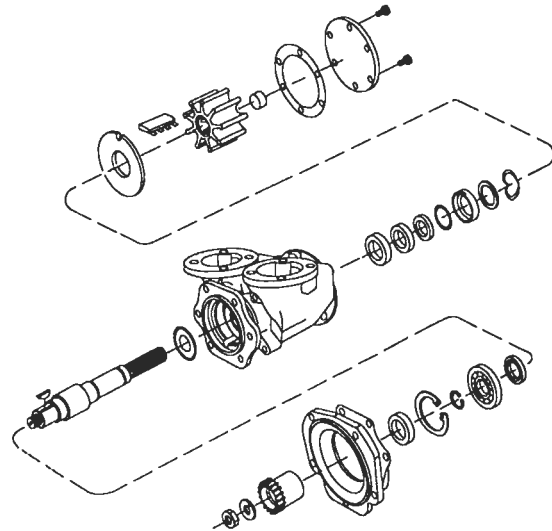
125 gal/min Raw Water Pump (Part No. 8927296)
